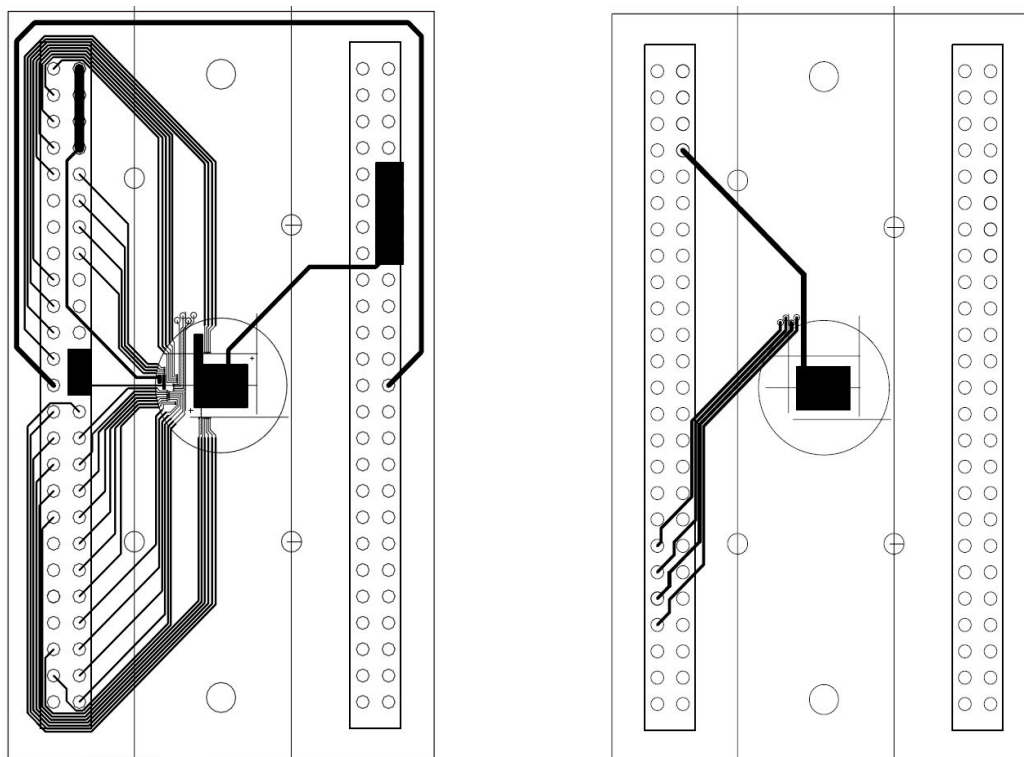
The support PCB for Peptidchip 3.1. Left: top layer, right: bottom layer. See A2.1 for a detailed view of the bond area. Only the left connector is used. Six holes are provided for mounting the chip covering.
